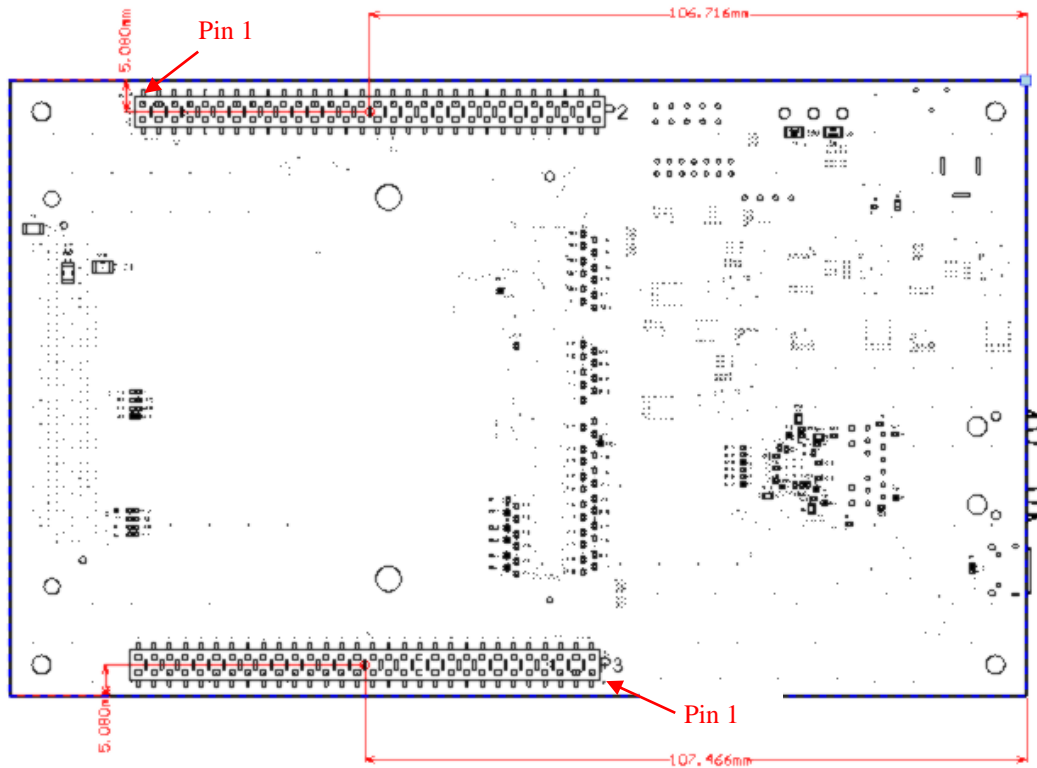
MitySOM-C10L Development Kit Outline, Bottom View / Connector Locations
